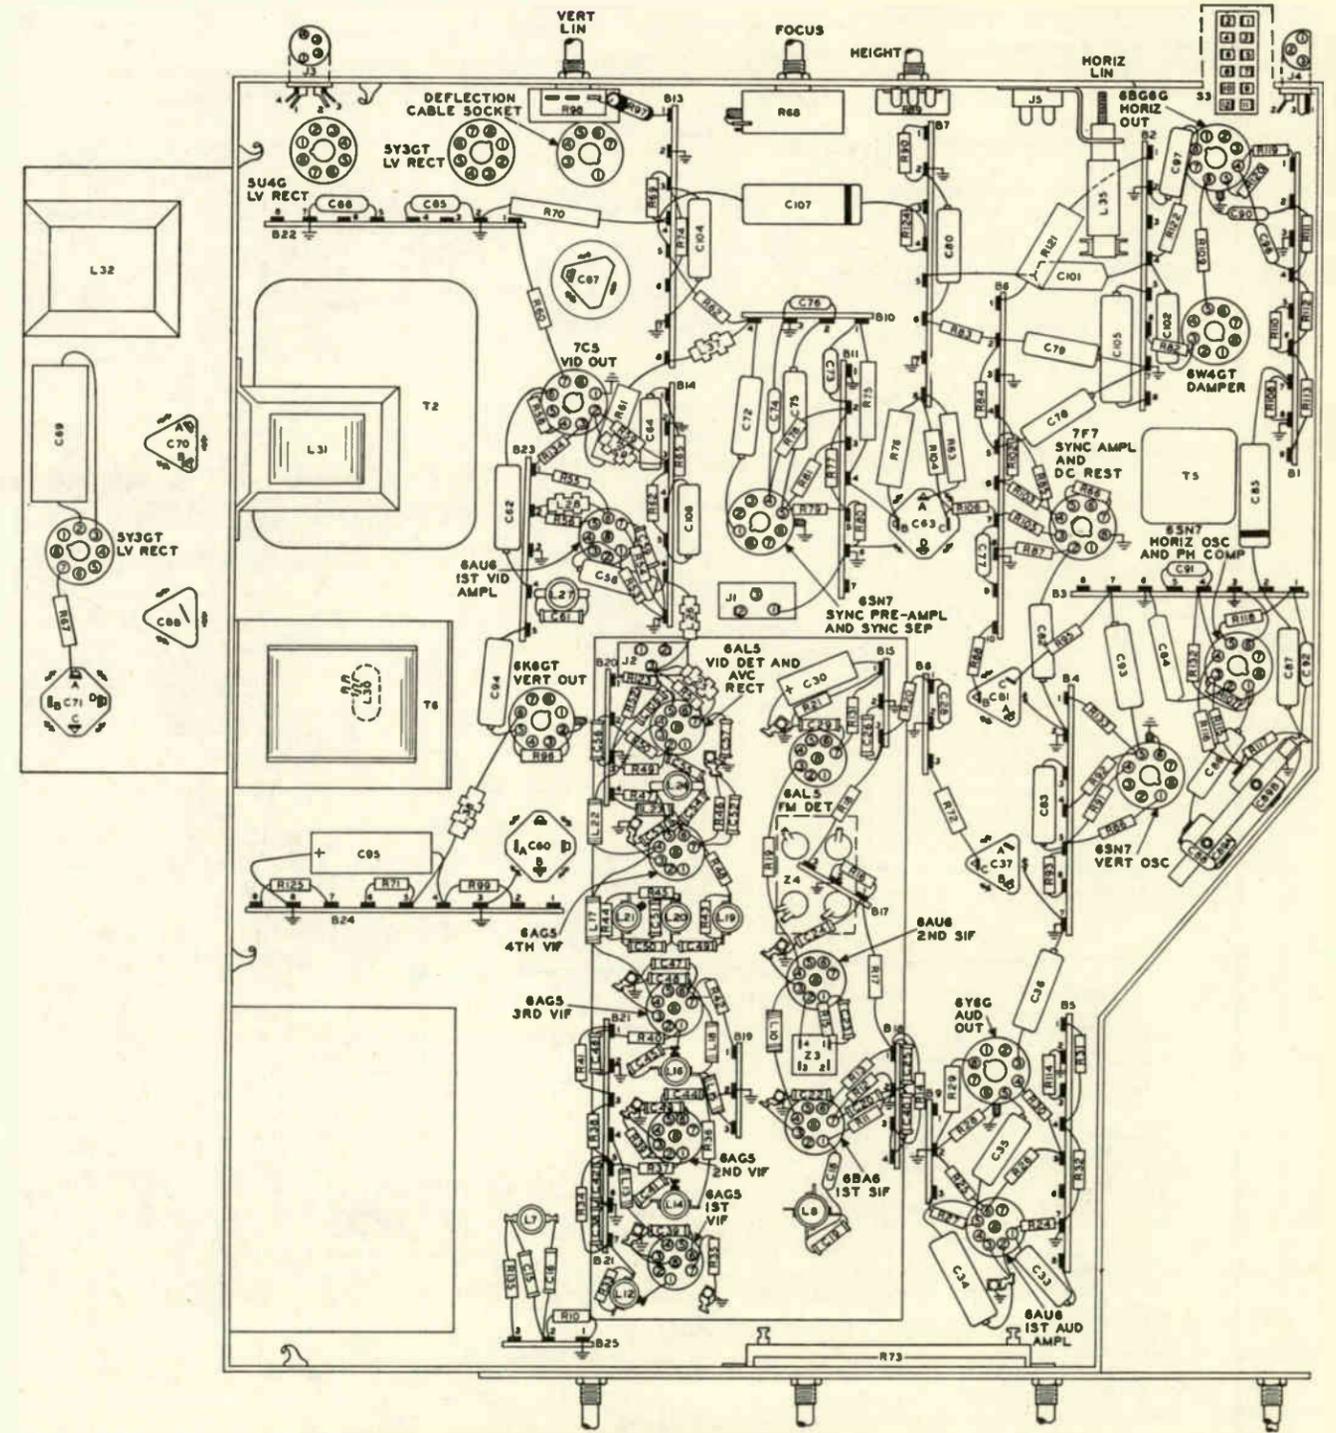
Bottom View of Model 50-T1630, Showing Locations of Components
